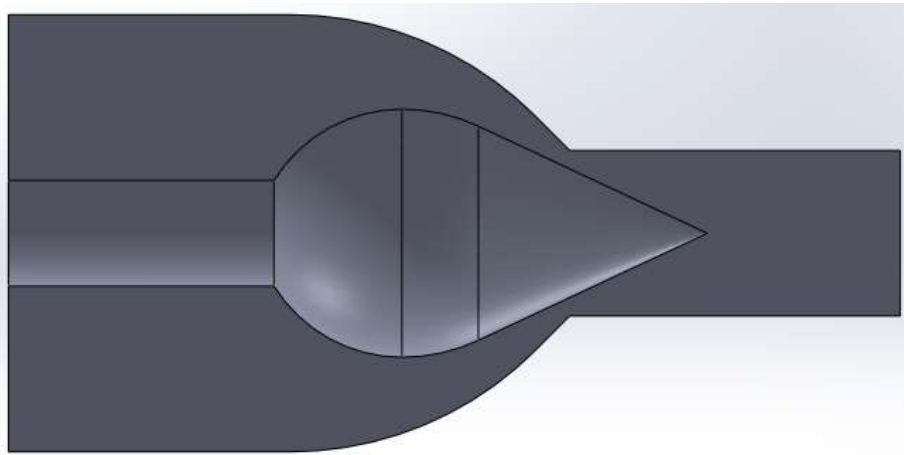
Side view of the Pelton turbine nozzle geometry (Section view).
